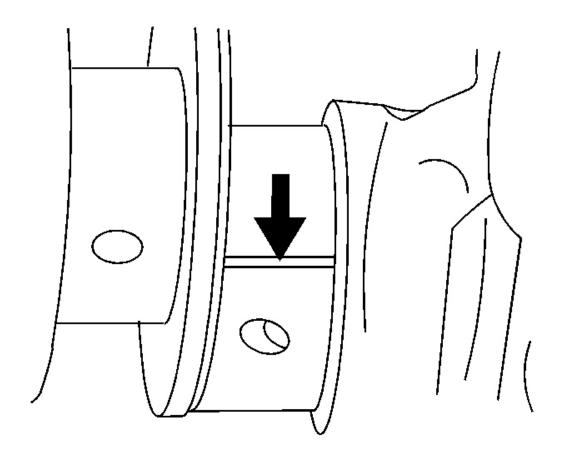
Installing Gaging Plastic Courtesy of GENERAL MOTORS CORP.
